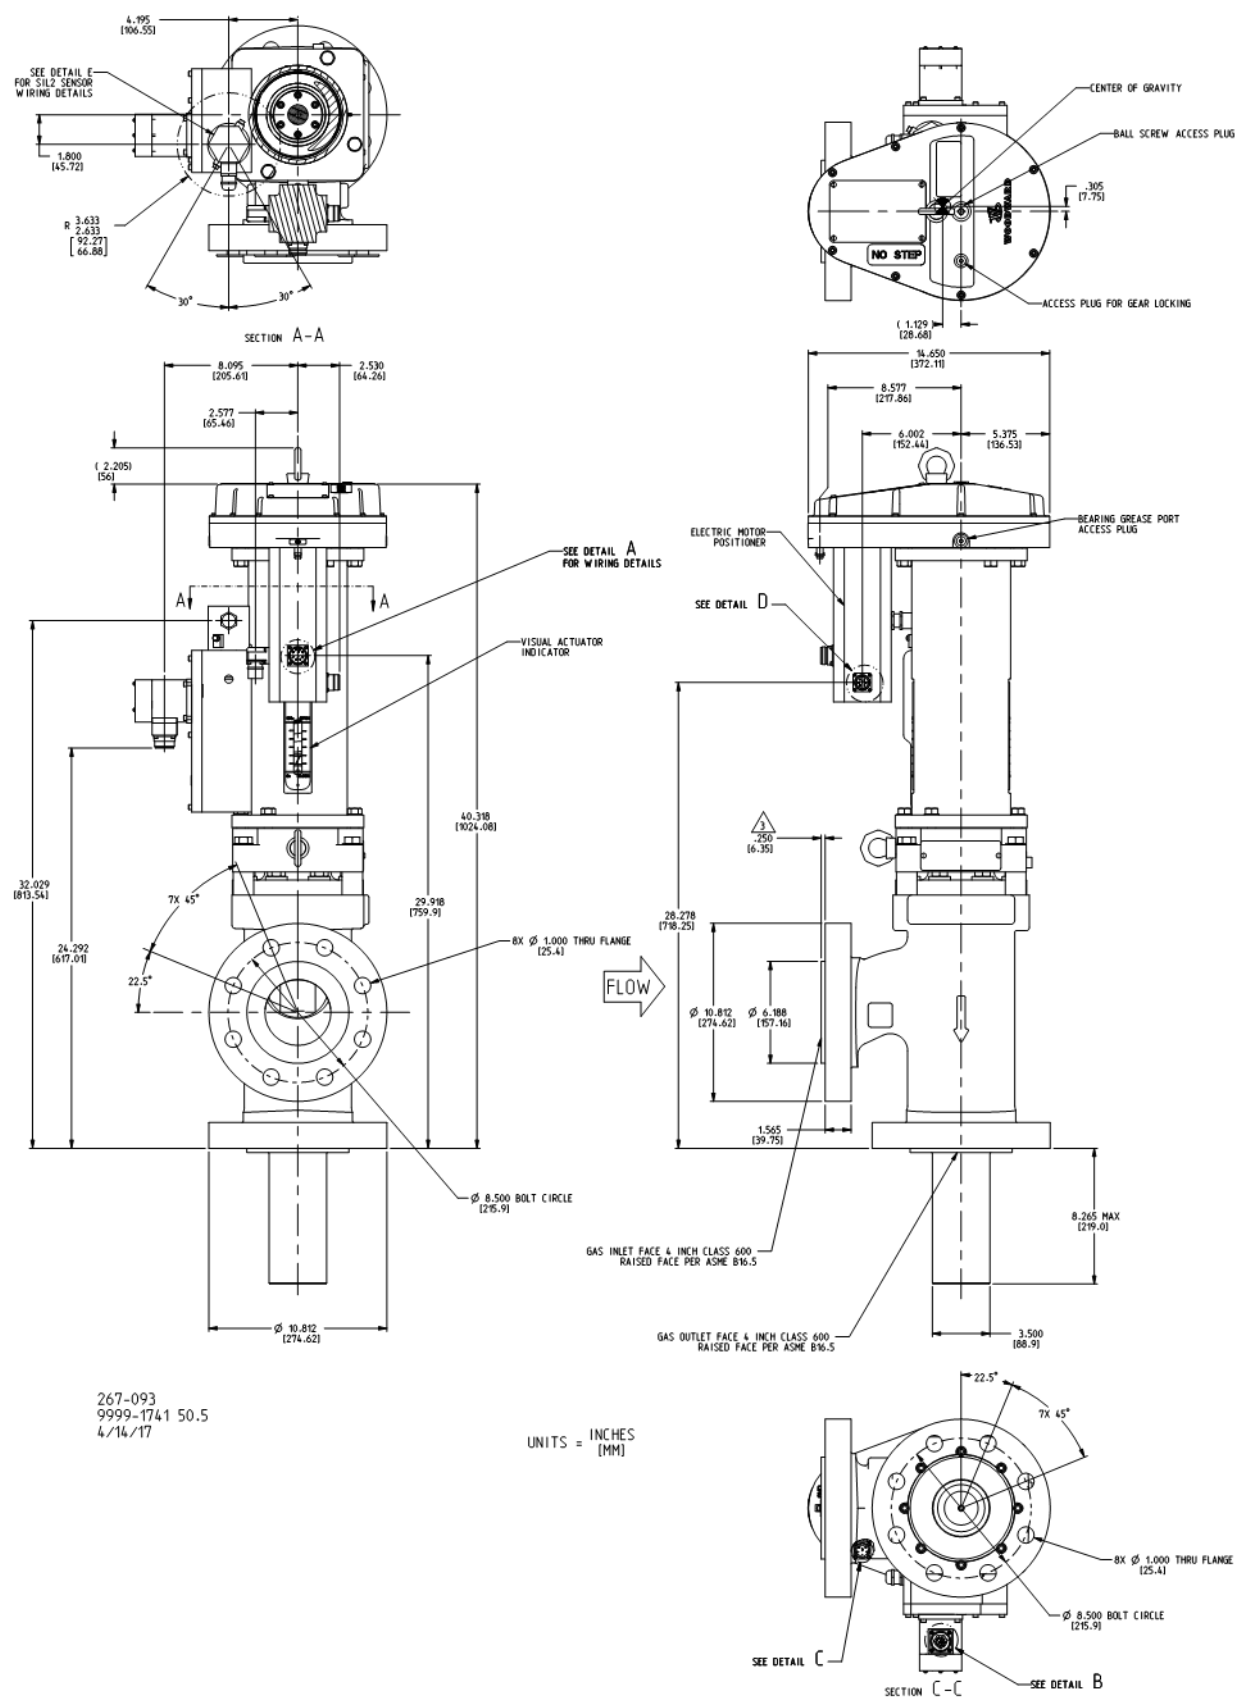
Outline Drawing (4-Inch UHR LESV)
